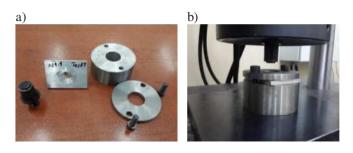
The parts of cutting test apparatus (a), and picture from during cutting test (b)
